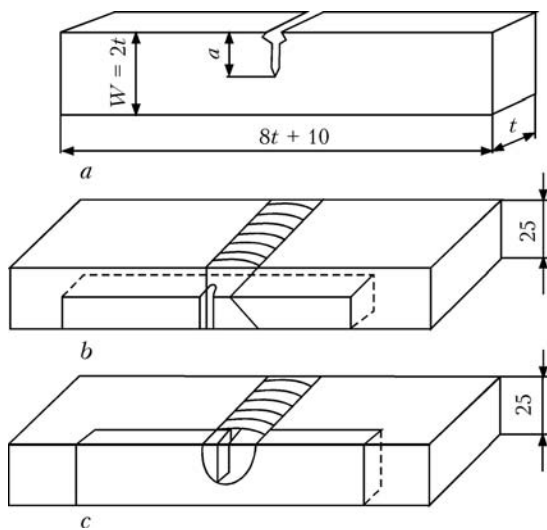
Schematics of specimens cut out from welded joints for CTOD with different shapes of notches
